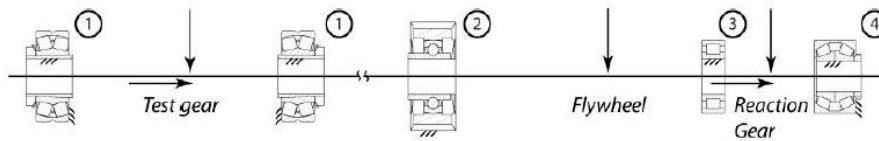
Bearings arrangement for one shaft branch of the test rig and average bearing stiffness in the loading range. 1. High-precision spherical roller bearing (1×10^9 N/m); 2. Y-bearing unit; 3. Wide-face single-row cylindrical roller bearing (6×10^8 N/m); 4. Double-row tapered roller bearing (1×10^9 N/m radial, 3×10^8 N/m axial). Reproduced from [1]
